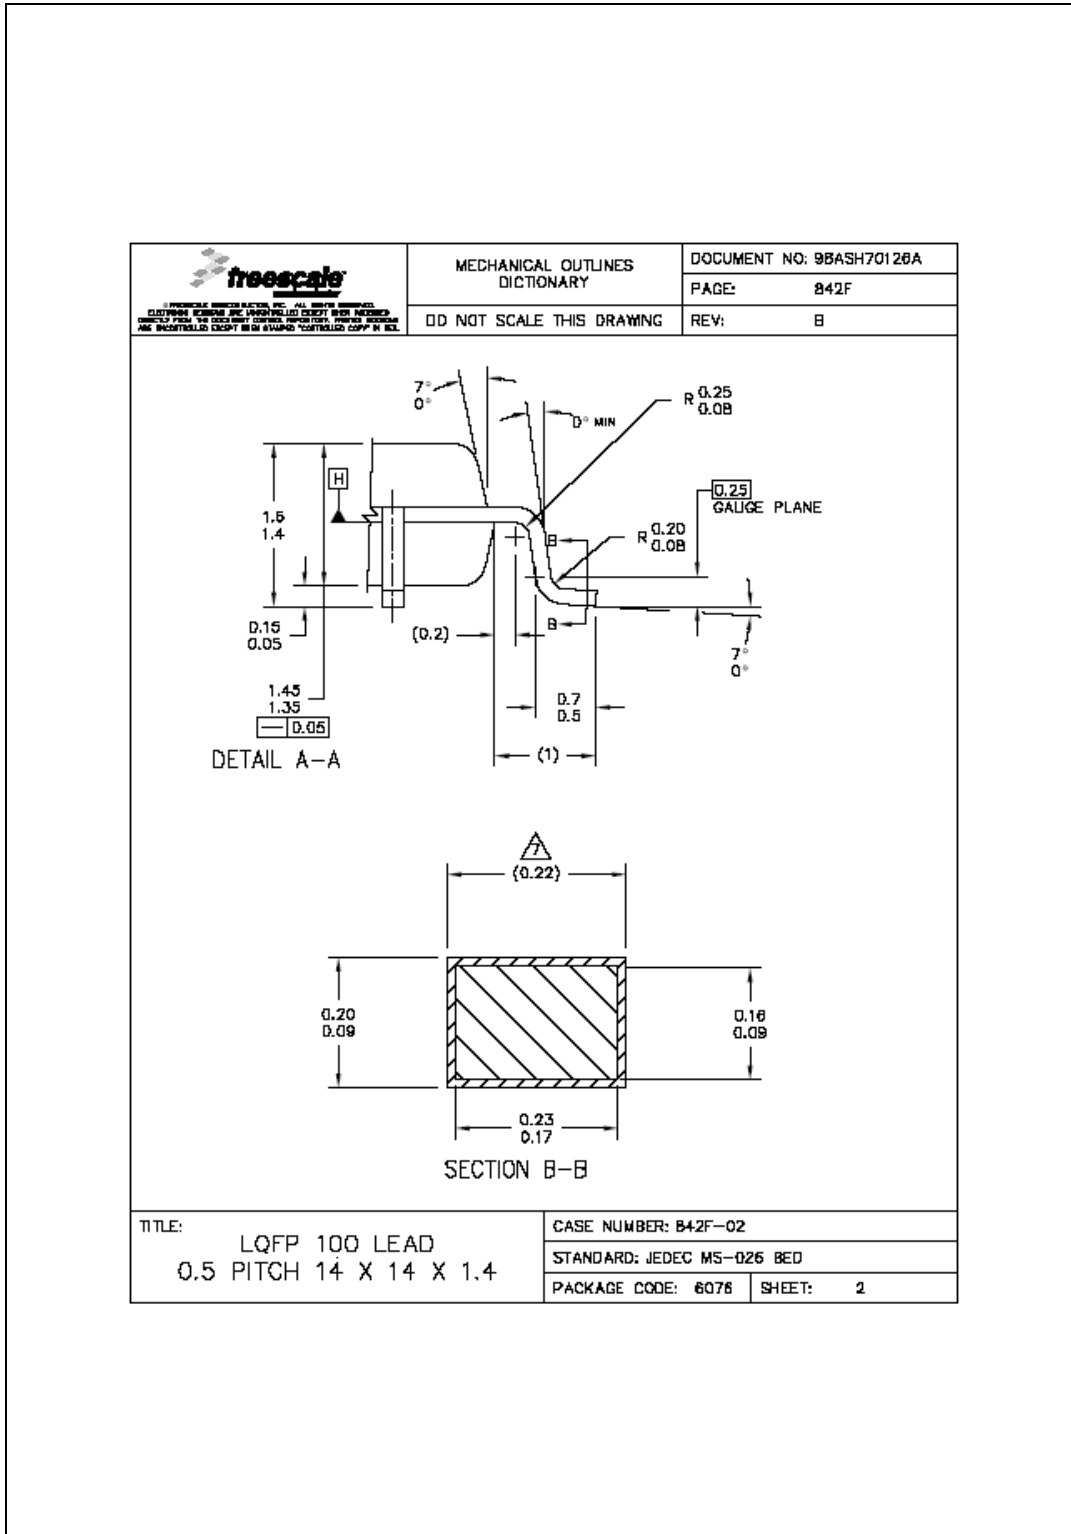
100 LQFP package mechanical drawing (Part 3 of 3)
